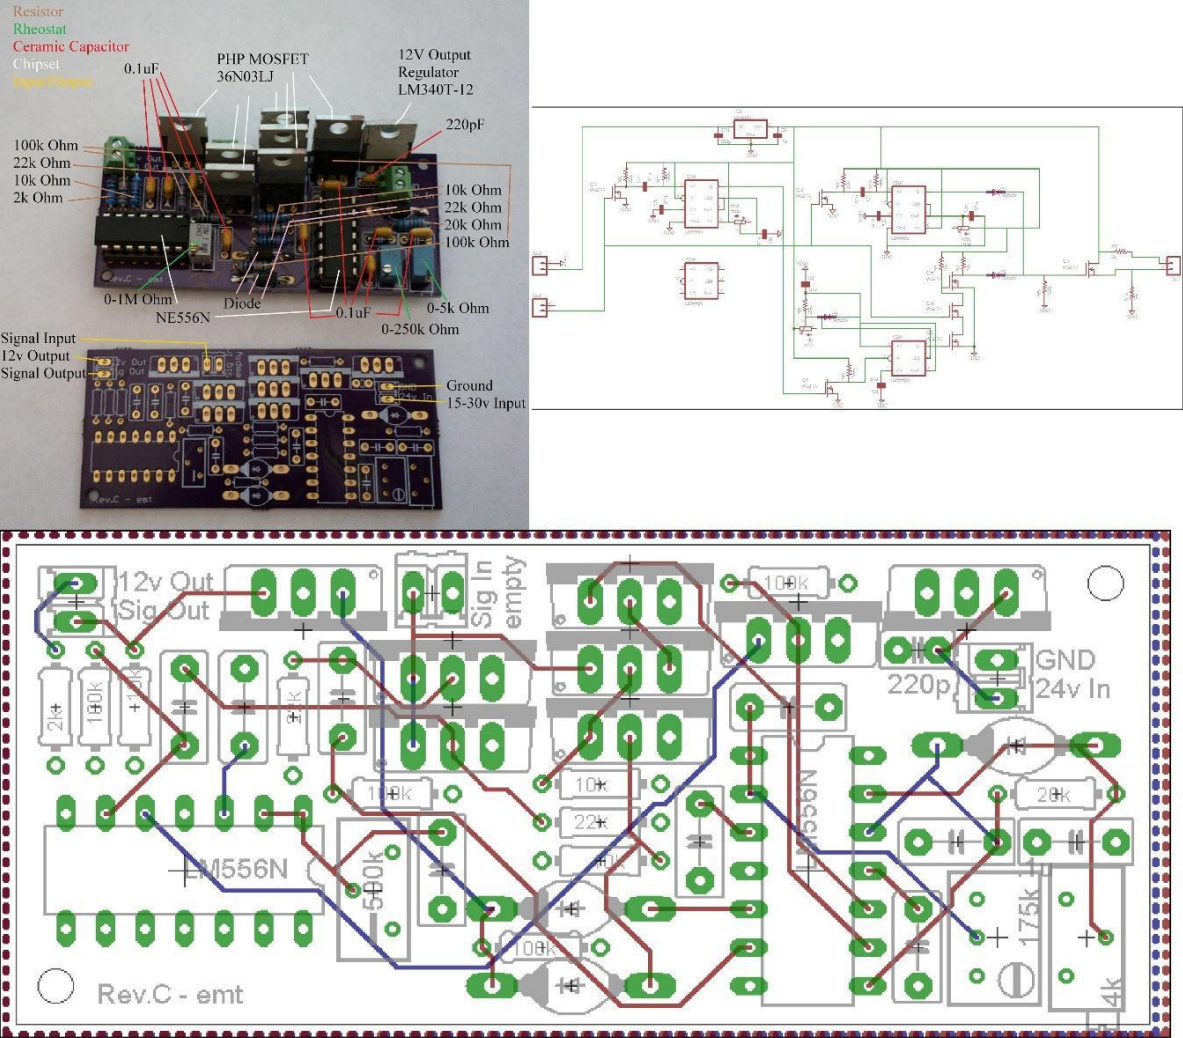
PWM control circuit details. Populated board, bare board, board layout, and schematic.
